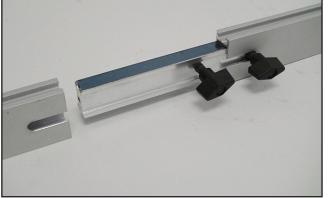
Detail A: Most horizontal extrusion connections have a patented expandable lock. This lock inserts into the groove of an opposing extrusion. Tightening the lock with the hex key tool expands the lock and creates a strong connection.
